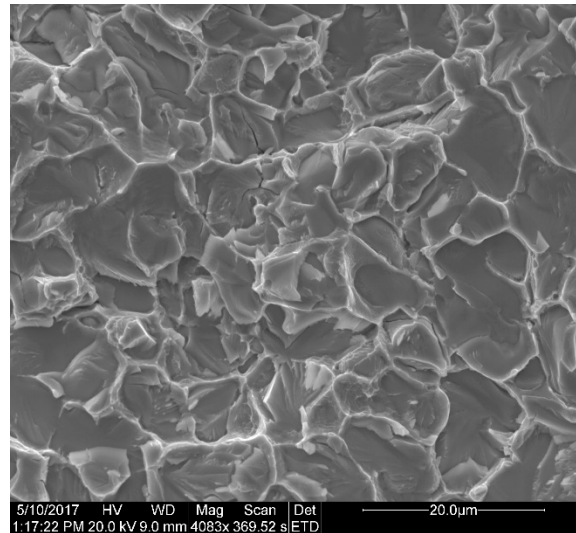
SEM image of A286-78-4 fracture surface at 4083x magnification showing brittle fracture.
